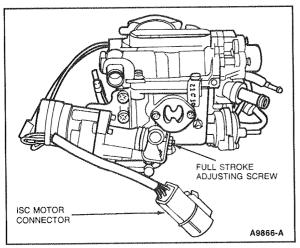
2.0L Engine Carburetor Full Stroke Adjustment
